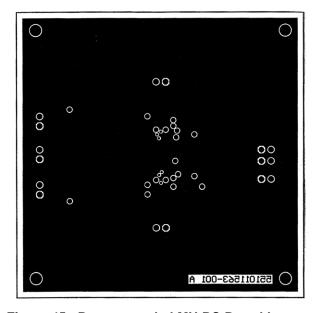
Recommended MH PC Board Layout: Bottom-Side Layout
